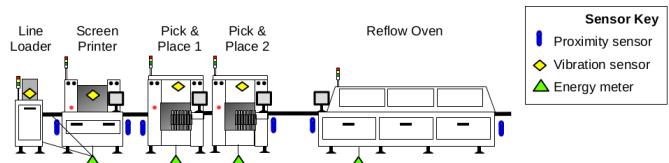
Schematic of the SMT PCB assembly line and the location of sensors deployed.
